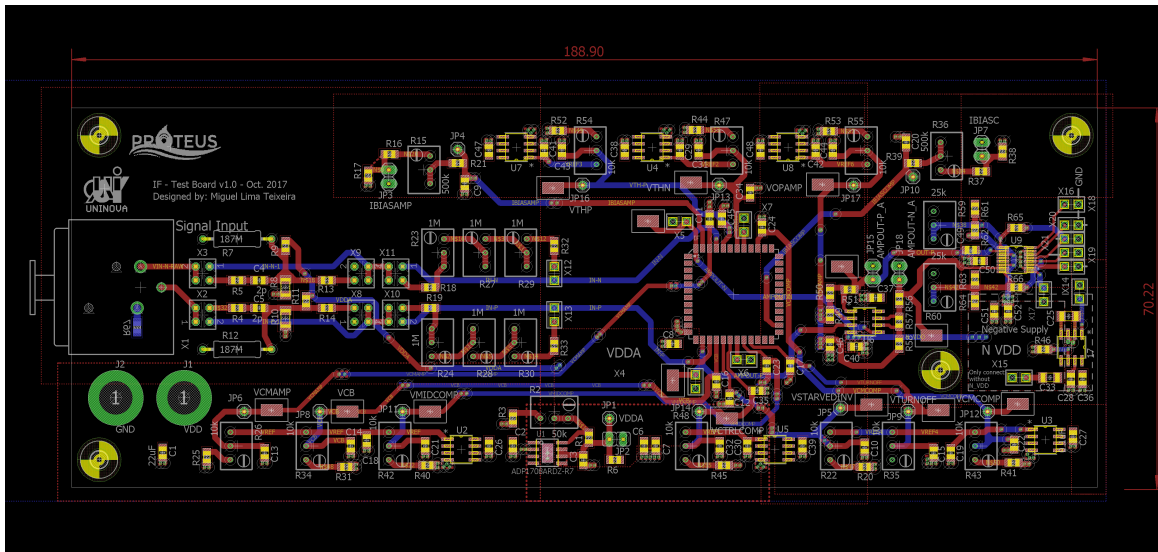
PCB layout of the IFC prototype test board, not showing power planes.
